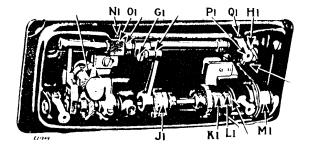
Base of Machine Showing Oiling Points and Adjustments
